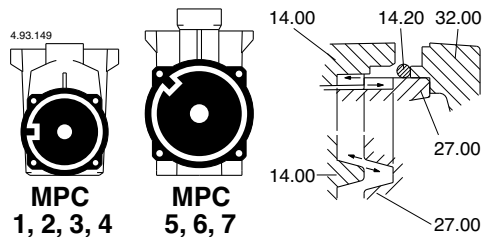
Locating lug/slot for assembling pump casing (14.00) - diffuser cover (27.00).
